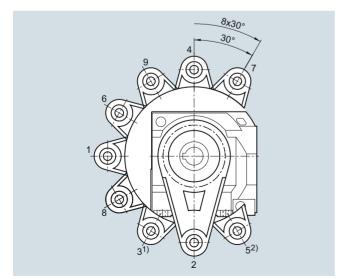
/11 Helical worm gearboxes CAD., Figure 1, sizes 39 to 89
